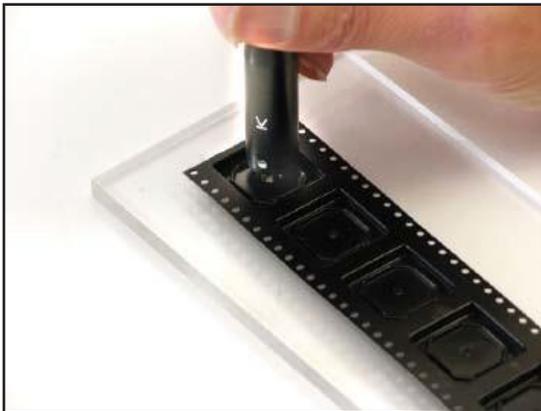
Measurement Illustrations Using the Prostat PRF-922B Fixture
